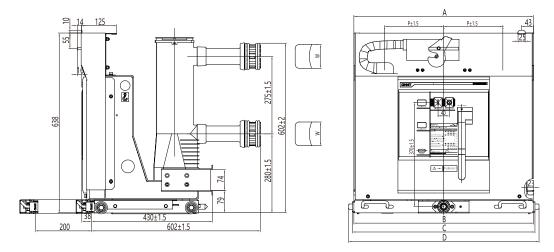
Outline and assembling sizes of trolly type circuit breaker
